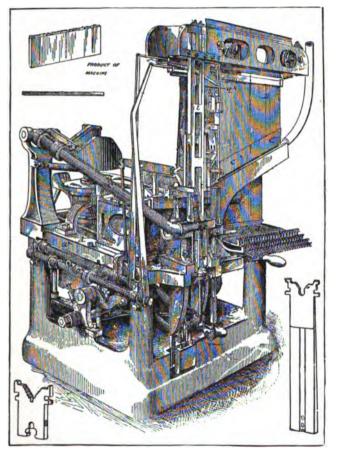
Linotype ; independent matrix machine of 1885 with blower ; with views of shug, matrix, and wedge-space or space-band.
